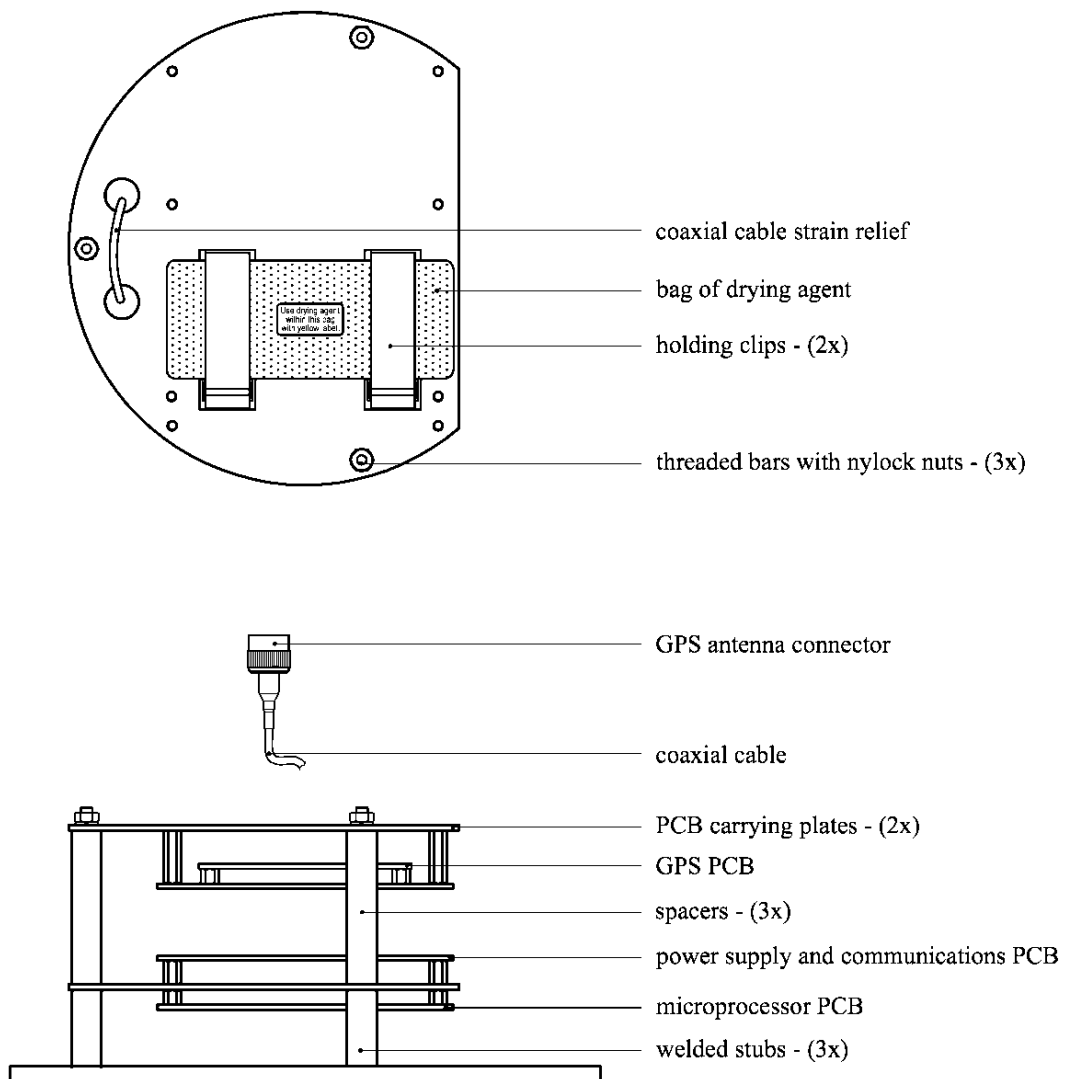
Schematic drawing of the electronics unit and its constituting components
